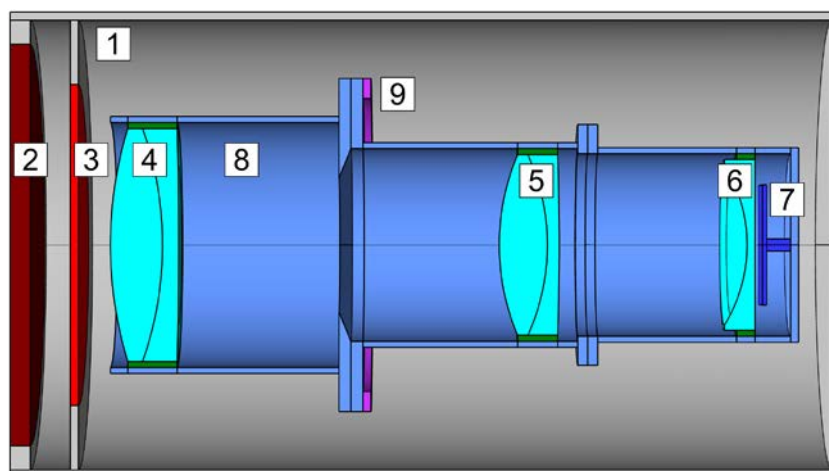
Schematic of the Petzval lens assembly with added barrel and thermovacuum chamber
